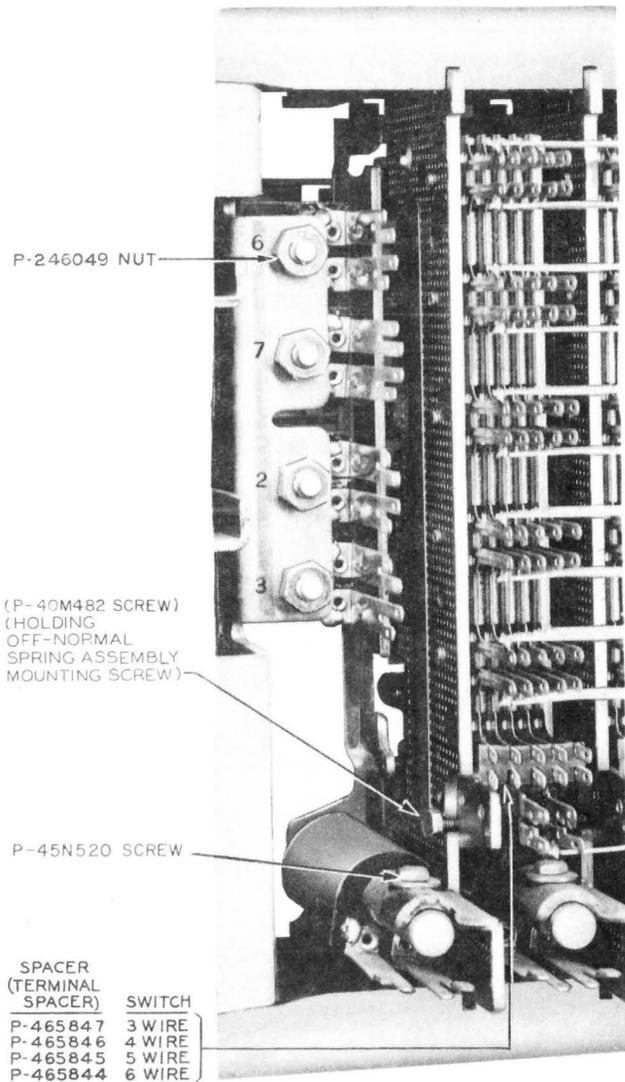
Partial Rear View of Switch Showing Magnet Mounting Parts and Terminal Spacers
